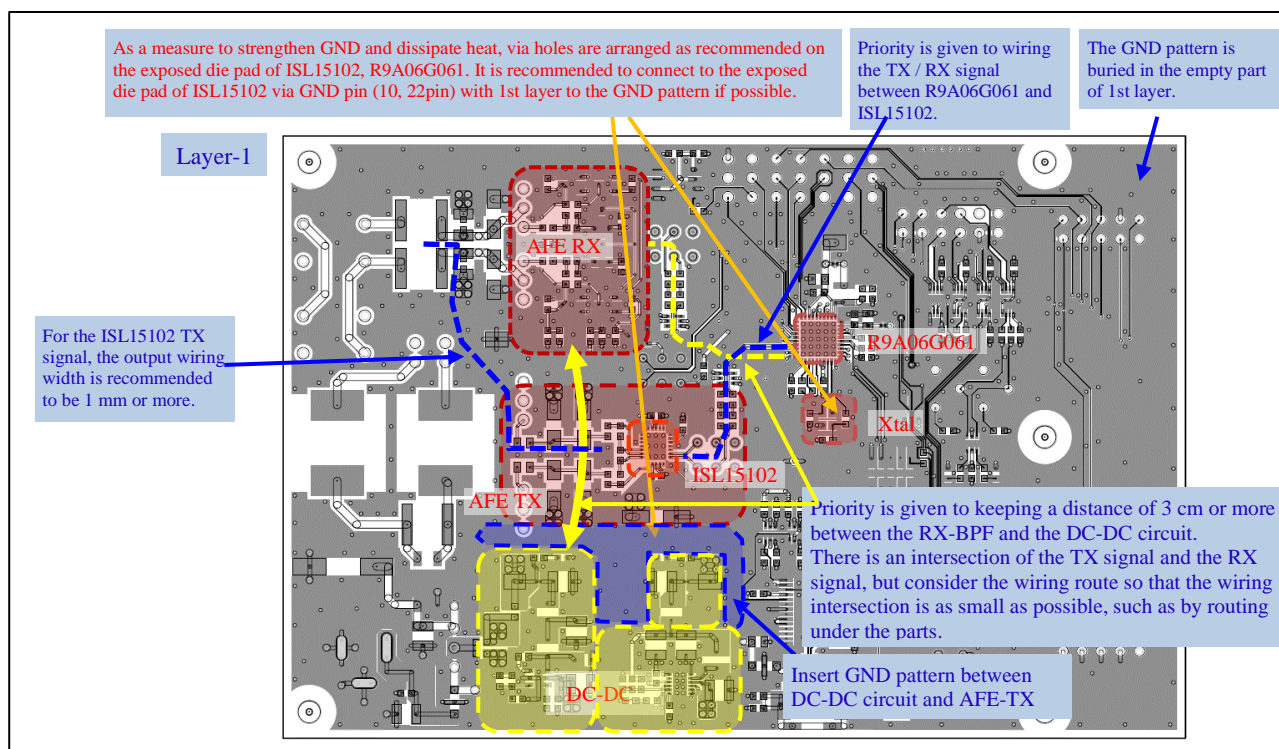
Layout example of the 1st layer of the DC-PLC board
